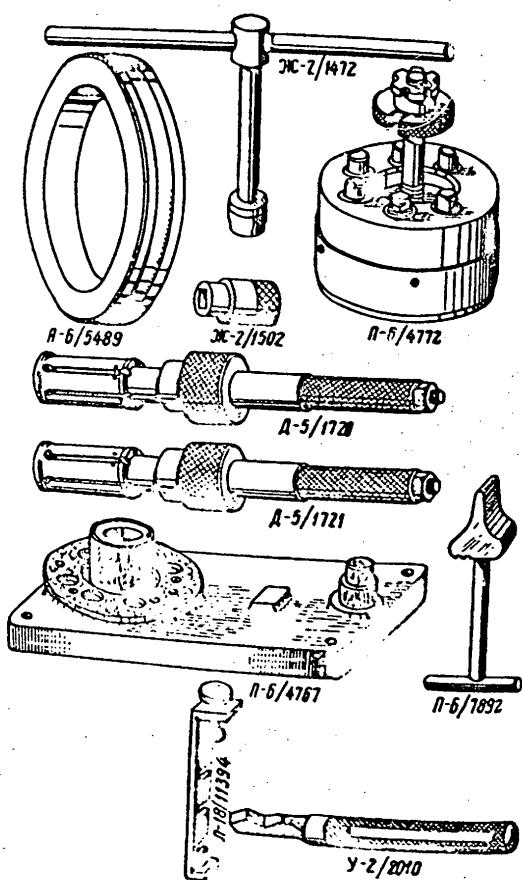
TOOLS, FIXTURES AND APPLIANCES FOR ASSEMBLY OF CONNECTING RODS
